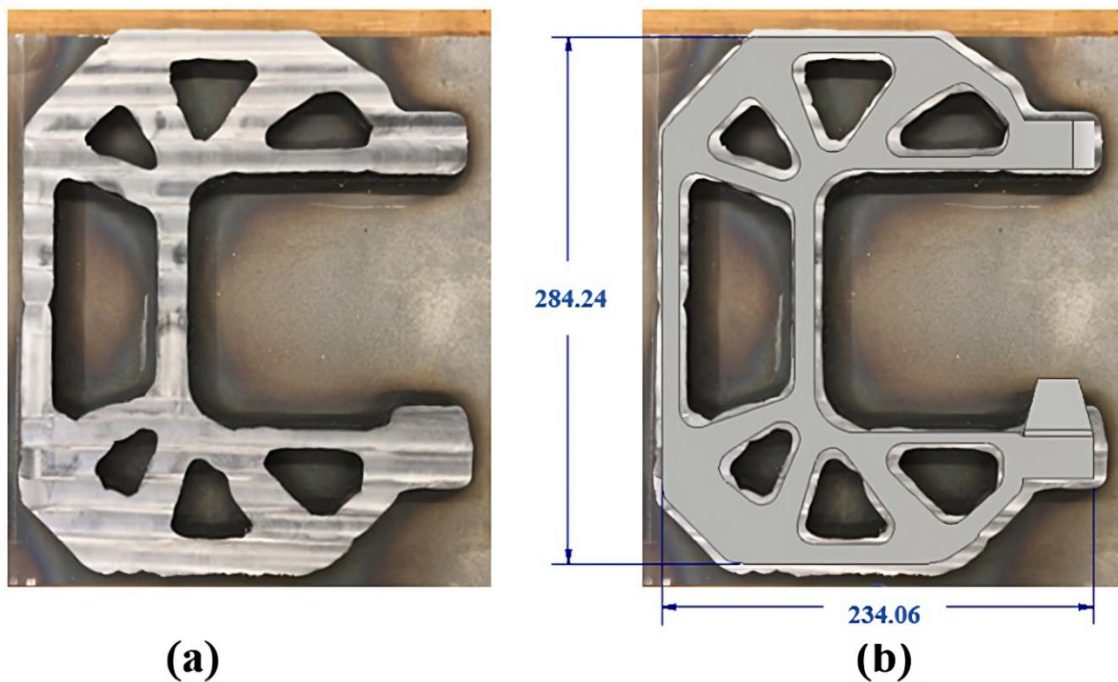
C-frame of the resistance spot welding gun: (a) The machined part and (b) the 3D CAD model superimposed the machined part (dimensions in mm)
